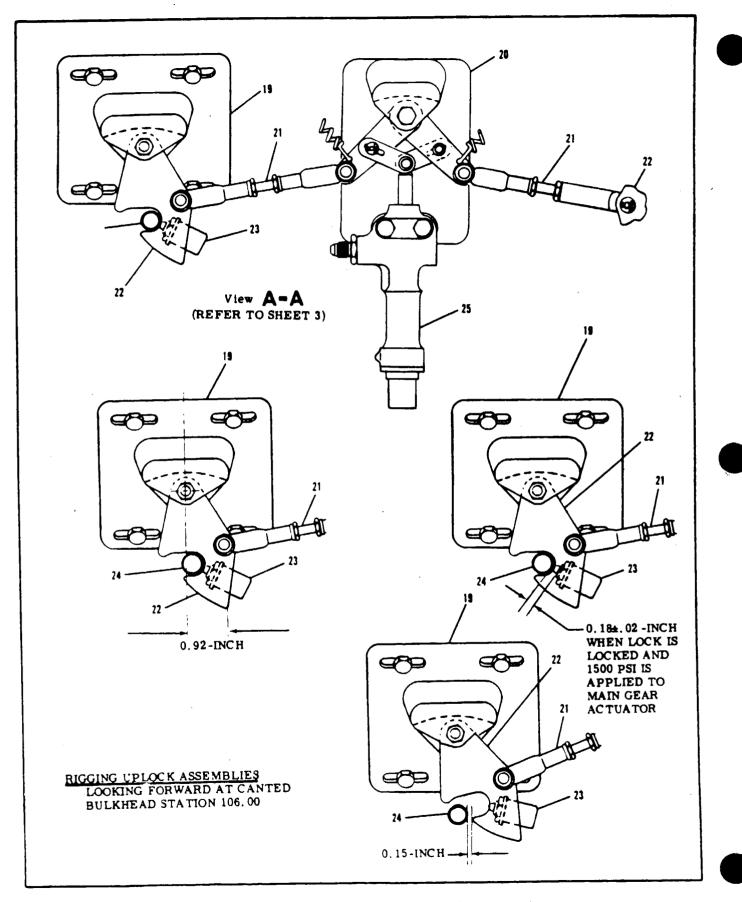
Rigging Main Landing Gear (Sheet 3 of 4)
